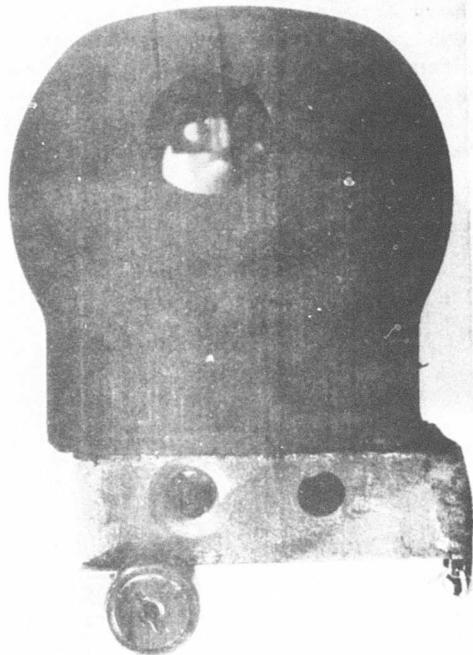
SUPPORT BLOCK ASSEMBLY -
